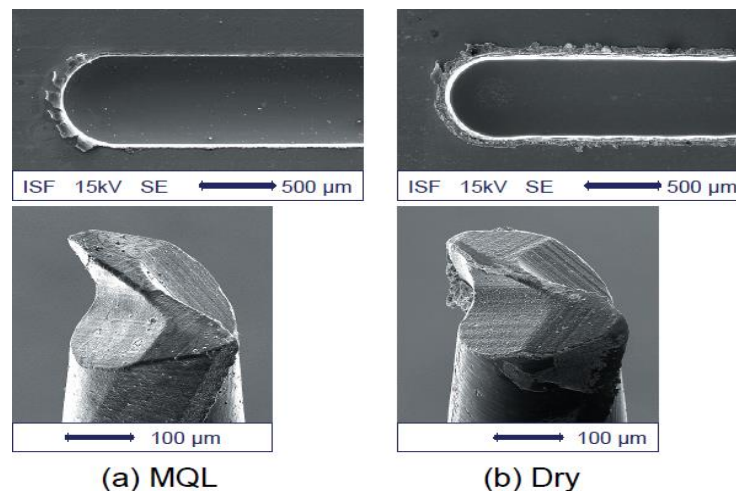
Slot Micro Milling with MQL and without Coolant (Workpiece – NiTi, Axial Depth 10µm; Tool Diameter 400 µm; Cutting Speed 33 m/min, Chip Load 12 µm/tooth) [10].
